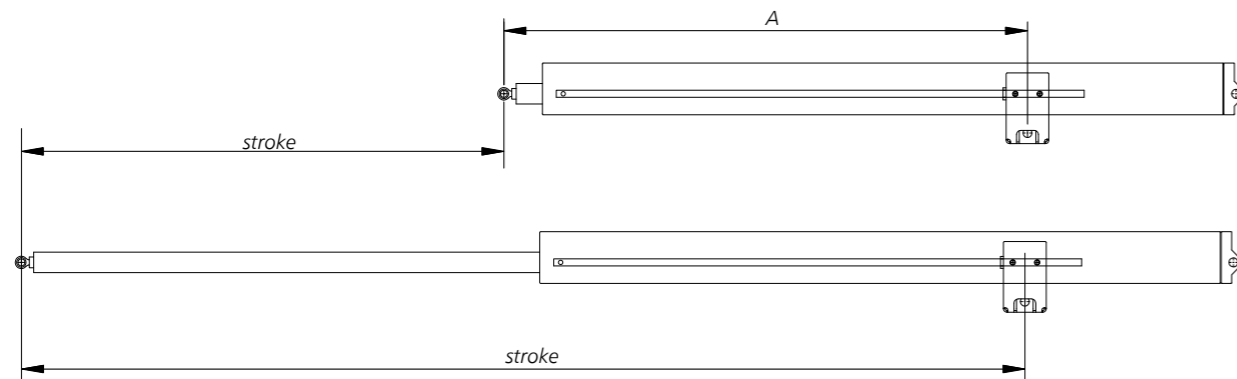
Dimensions of type G spindle actuator with shifted pivot point
